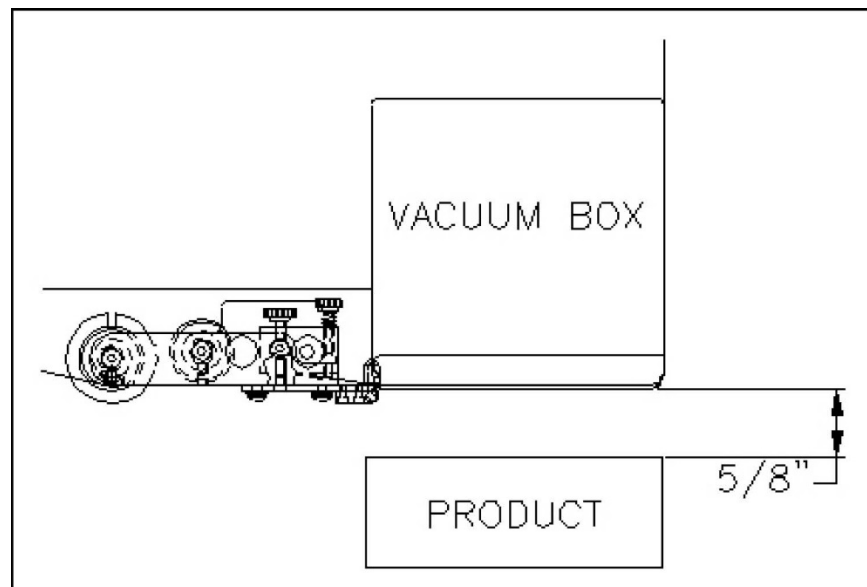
Applicator/Product Position (Right Hand Machine Shown)
